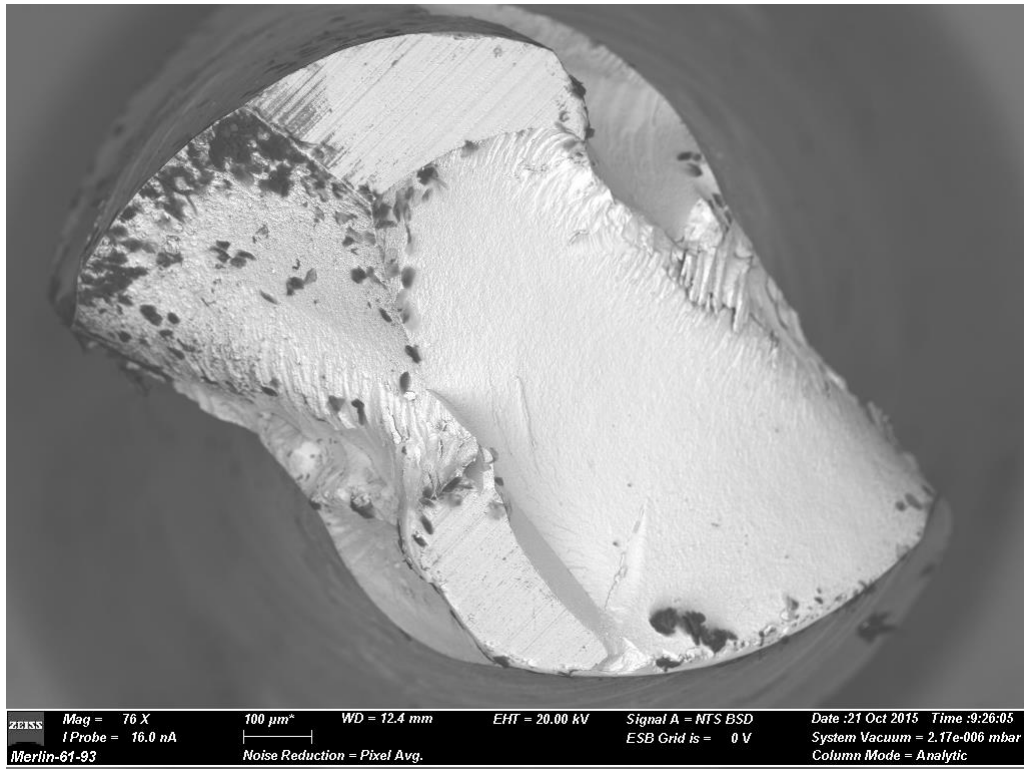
Experimental run 13: Tungsten carbide tool after machining with parameters $v_c = 84.82$ [m/min], $v_f = 864$ [mm/min] and $a_p = 125$ [μm]
